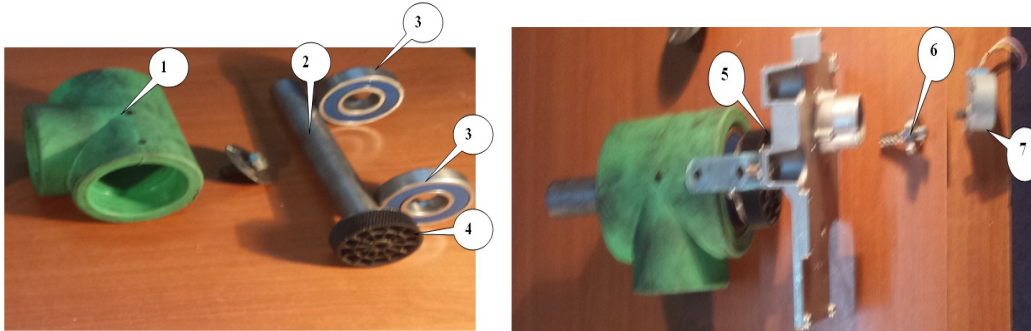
Exploded view of the mechanical assembly of the horizontal axis
